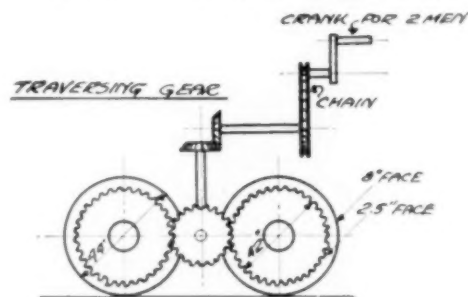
TRAVERSING GEAR, BATTERY KAISER WILHELM II
